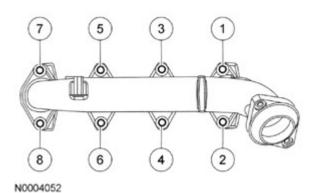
Identifying Tightening Sequence Of LH Exhaust Manifold Bolts Courtesy of FORD MOTOR CO.
